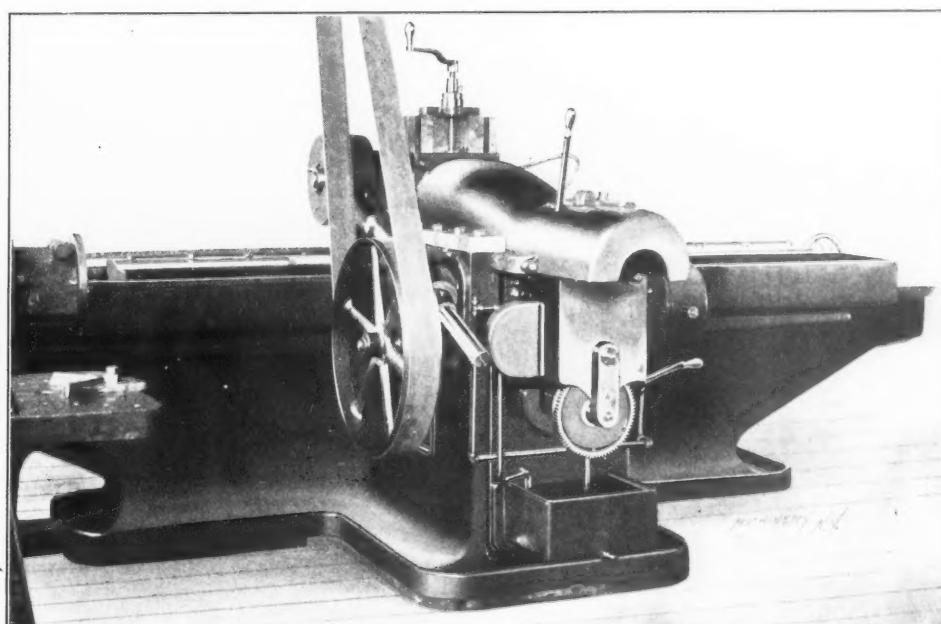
Rear View of Rack-cutter, showing Driving Mechanism.
